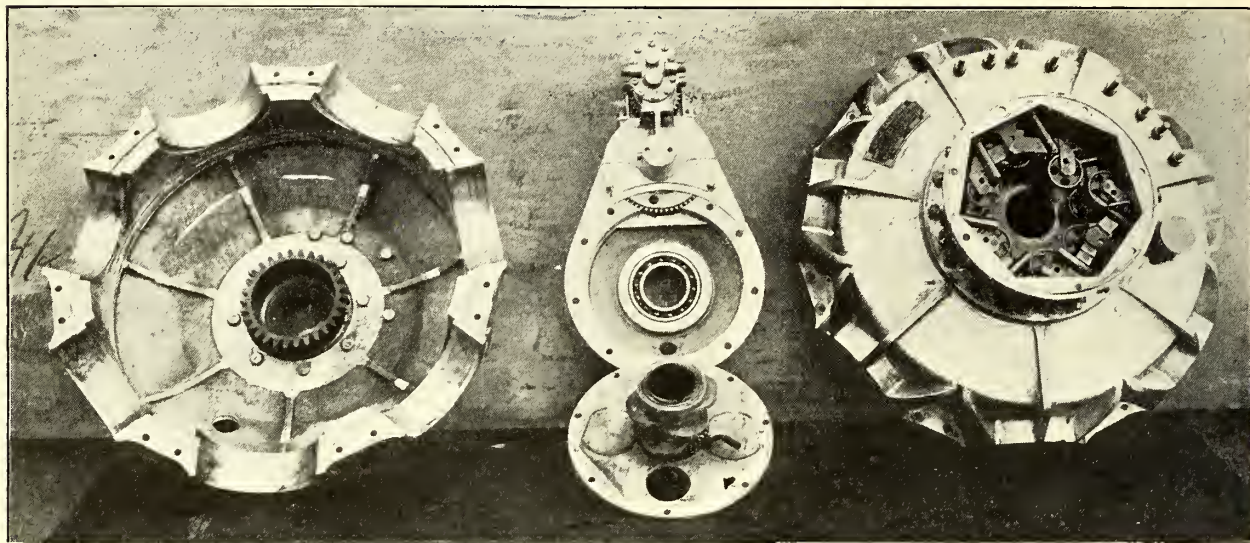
Fig. III., showing the Crank Case, Valve Gear, and Cams, etc., of the Salmson Engine.
